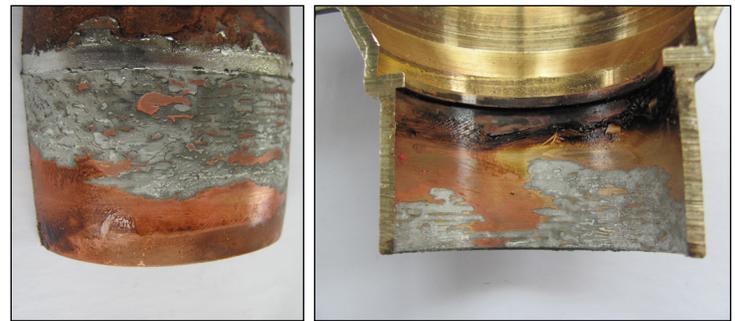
Improperly Heated Solder Joint – Incomplete solder flow in the capillary space due to inadequate preheating of the tube surface.
